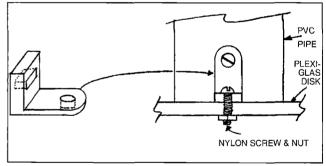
"L" shaped bracket to attach PVC pipe and coffee can to Plexiglas disk.
